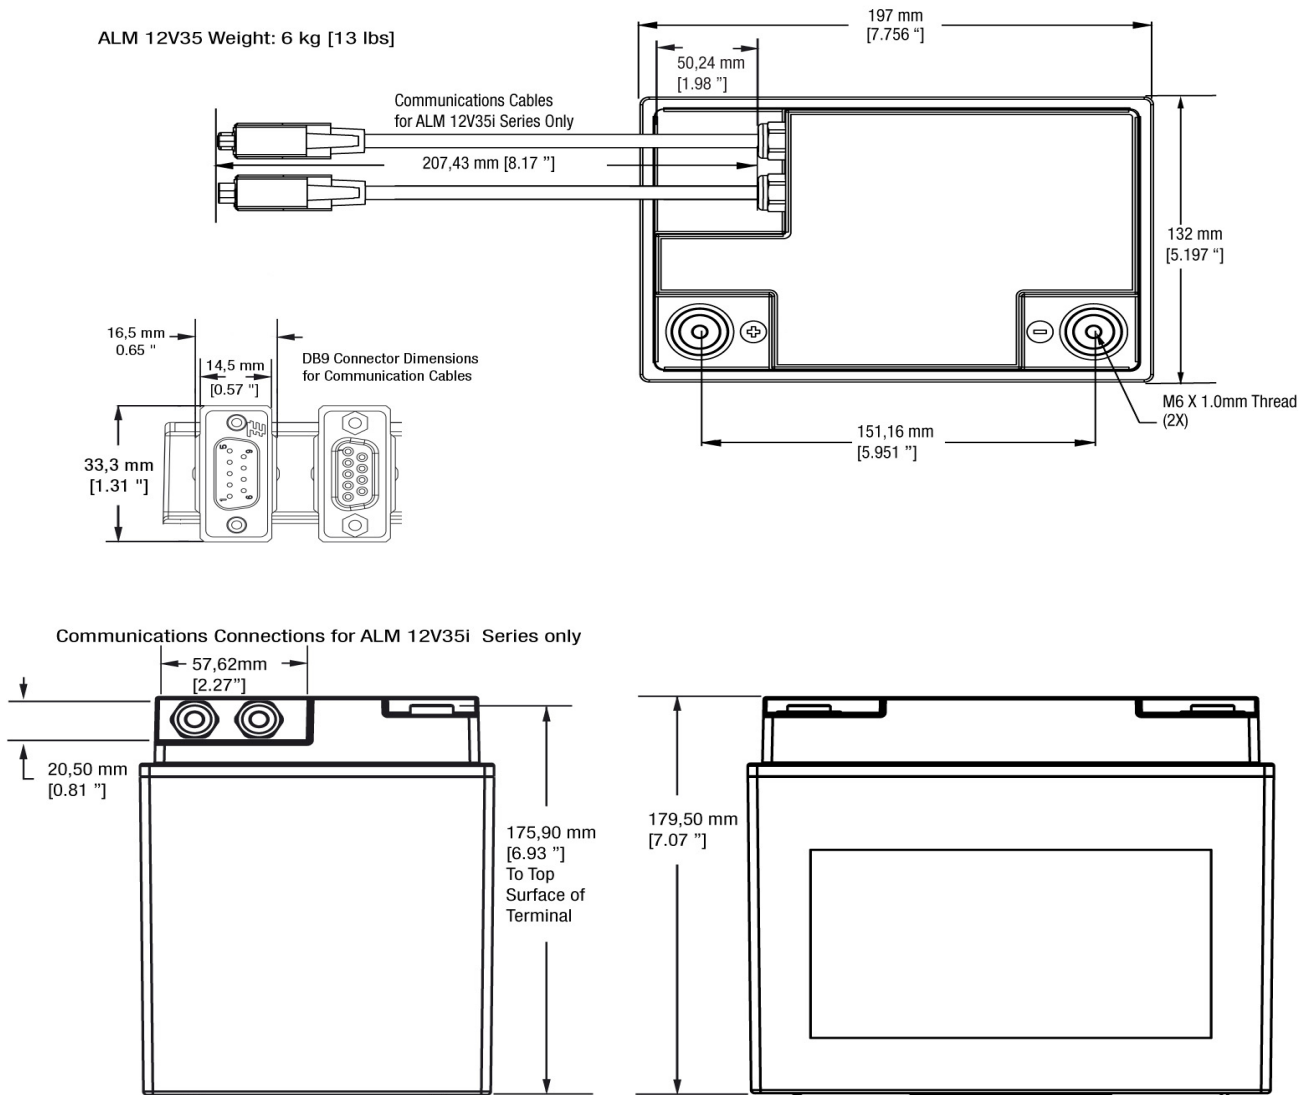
ALM 12V35 Mechanical Dimensions and Weight
